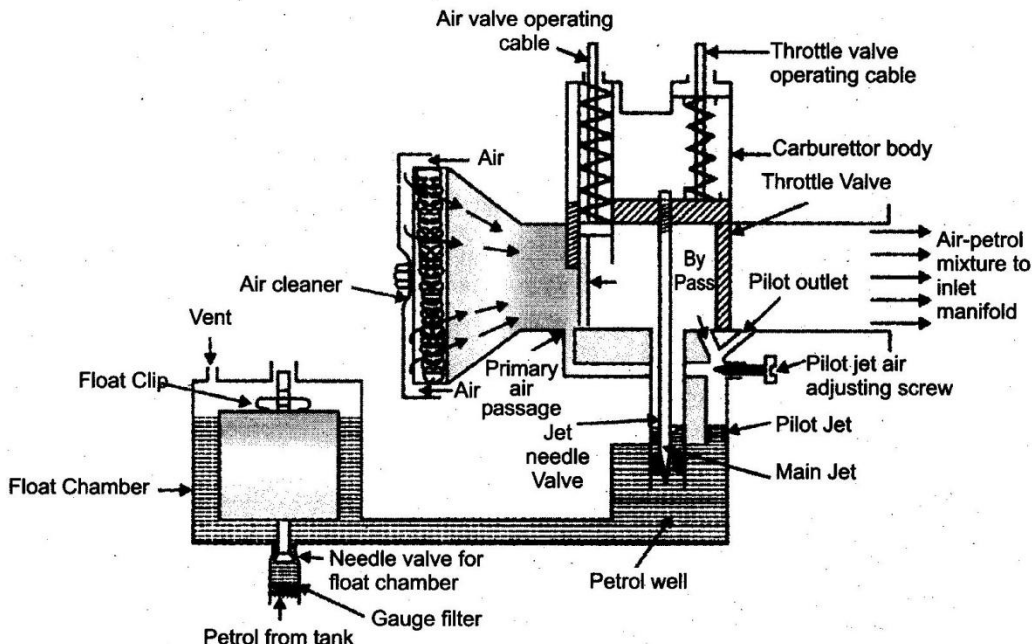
Amal carburettor (Simplified schematic diagram)
